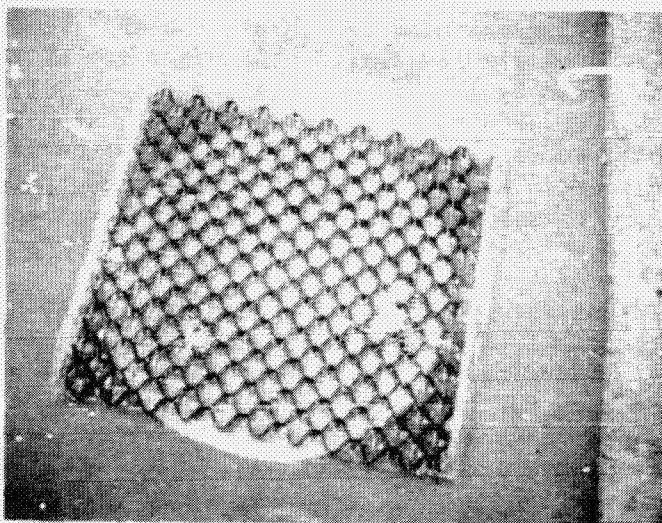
Assembly Tool for Cylindrical Panel Showing Core Node Spacers (Contract NAS3-14384)
